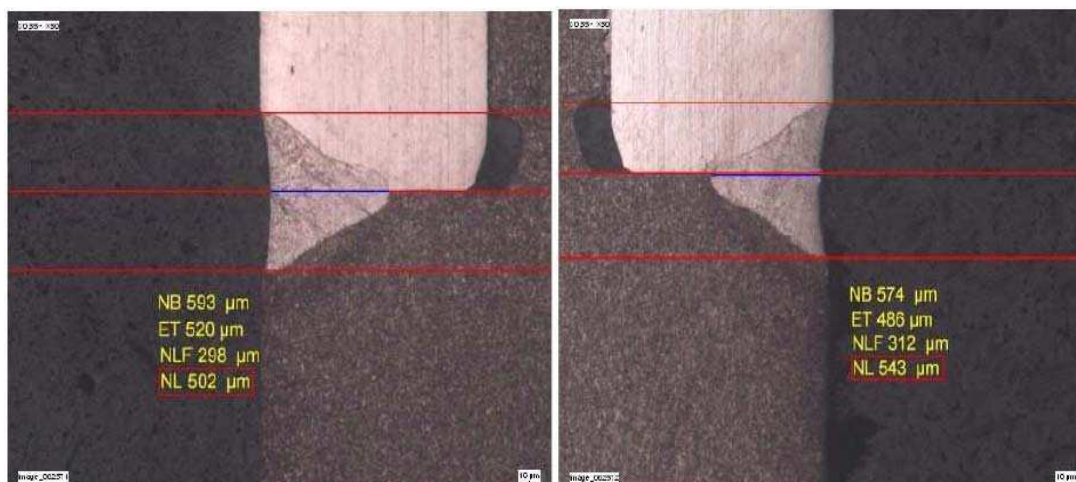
Left and right weld beads for 0.815 m.min<sup>-1</sup> welding speed
